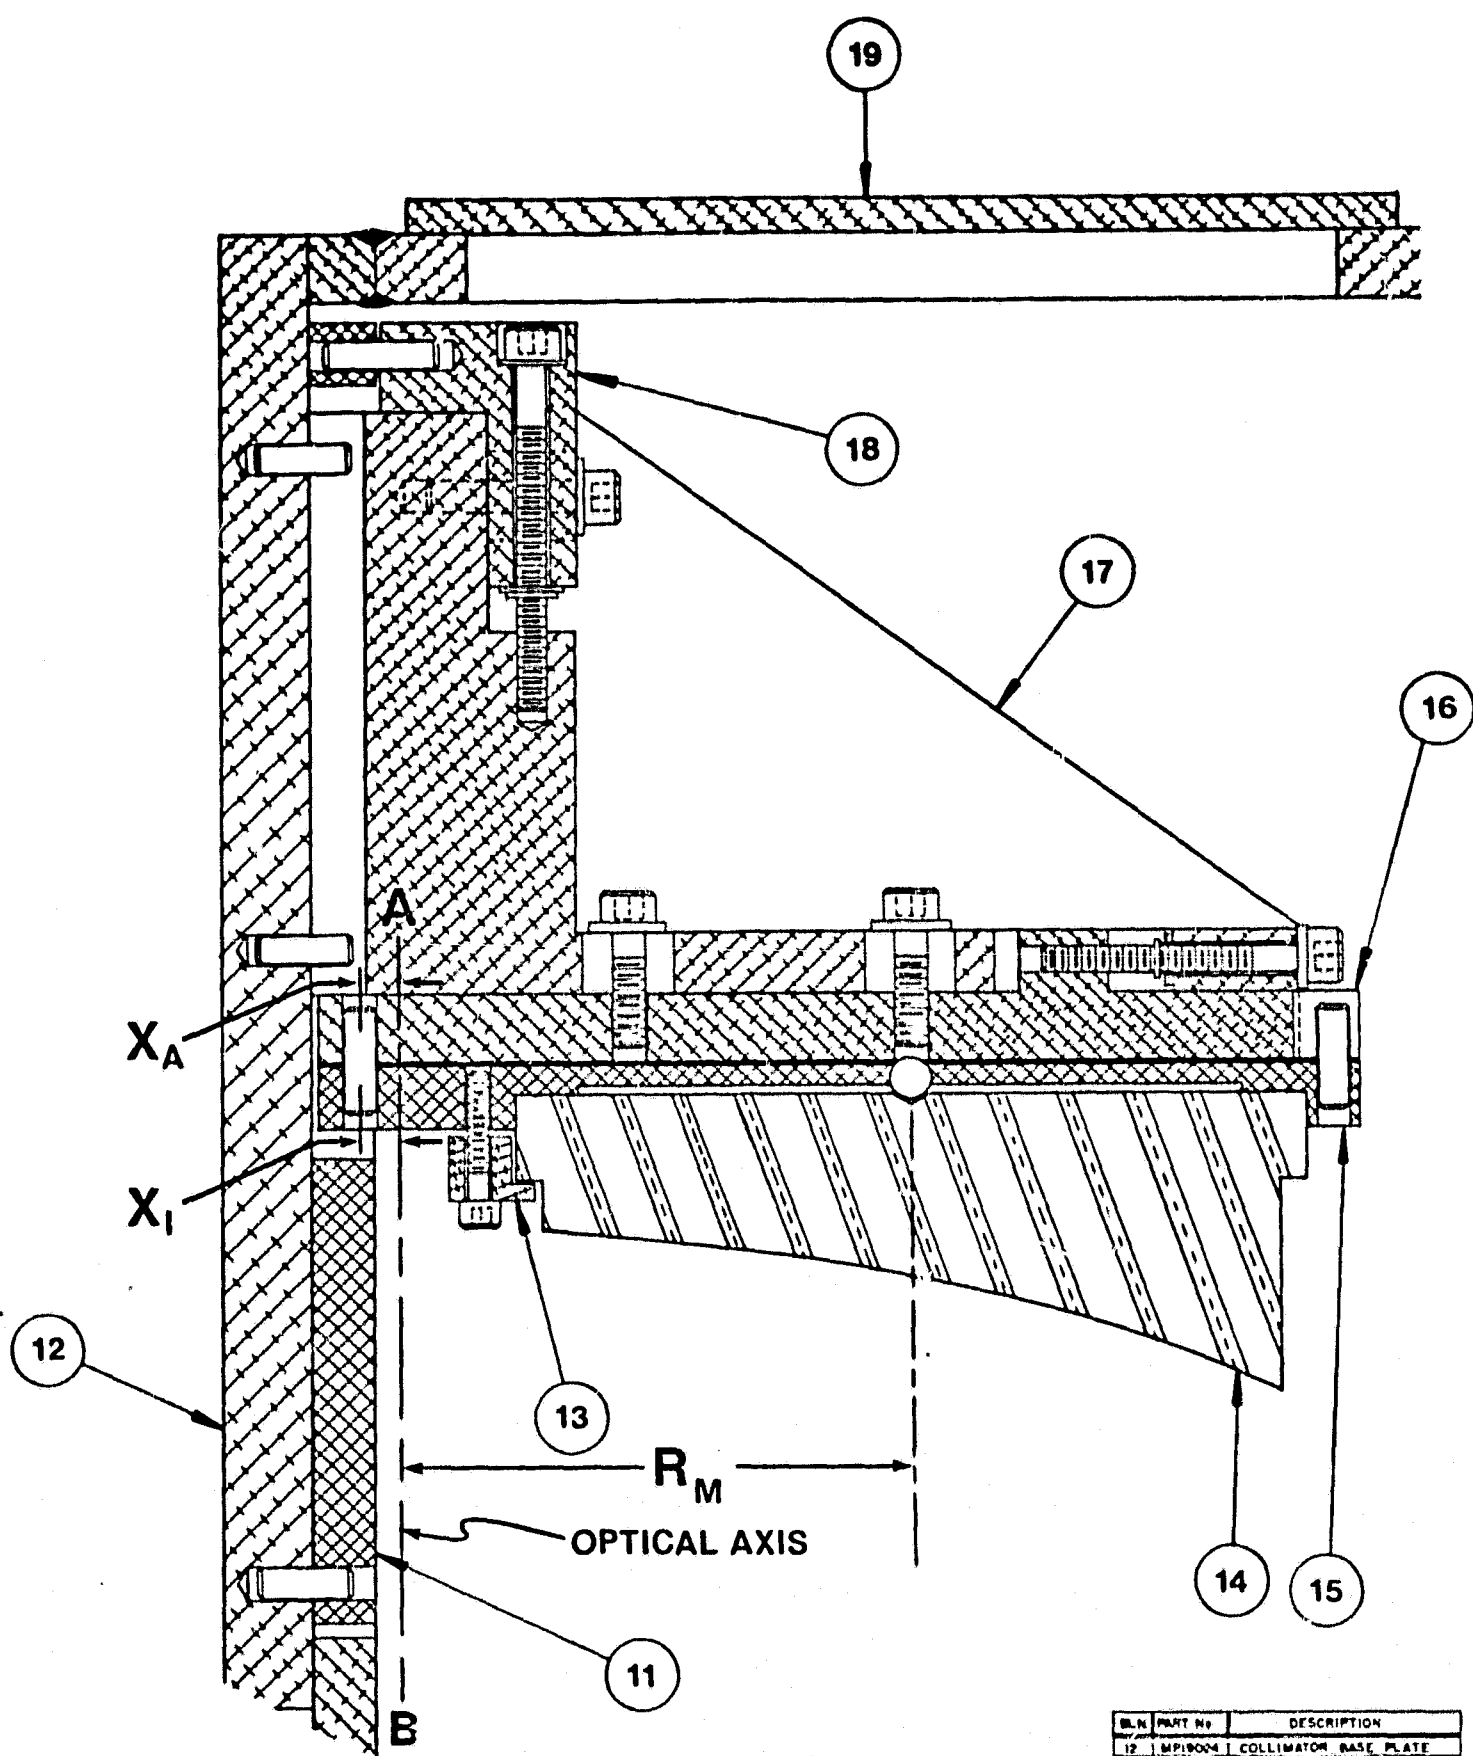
COLLIMATOR ASSEMBLY DETAIL
